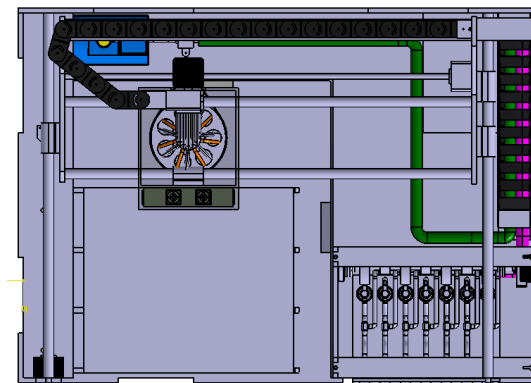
M²-3D Printer Machine Design Layout – Top View
